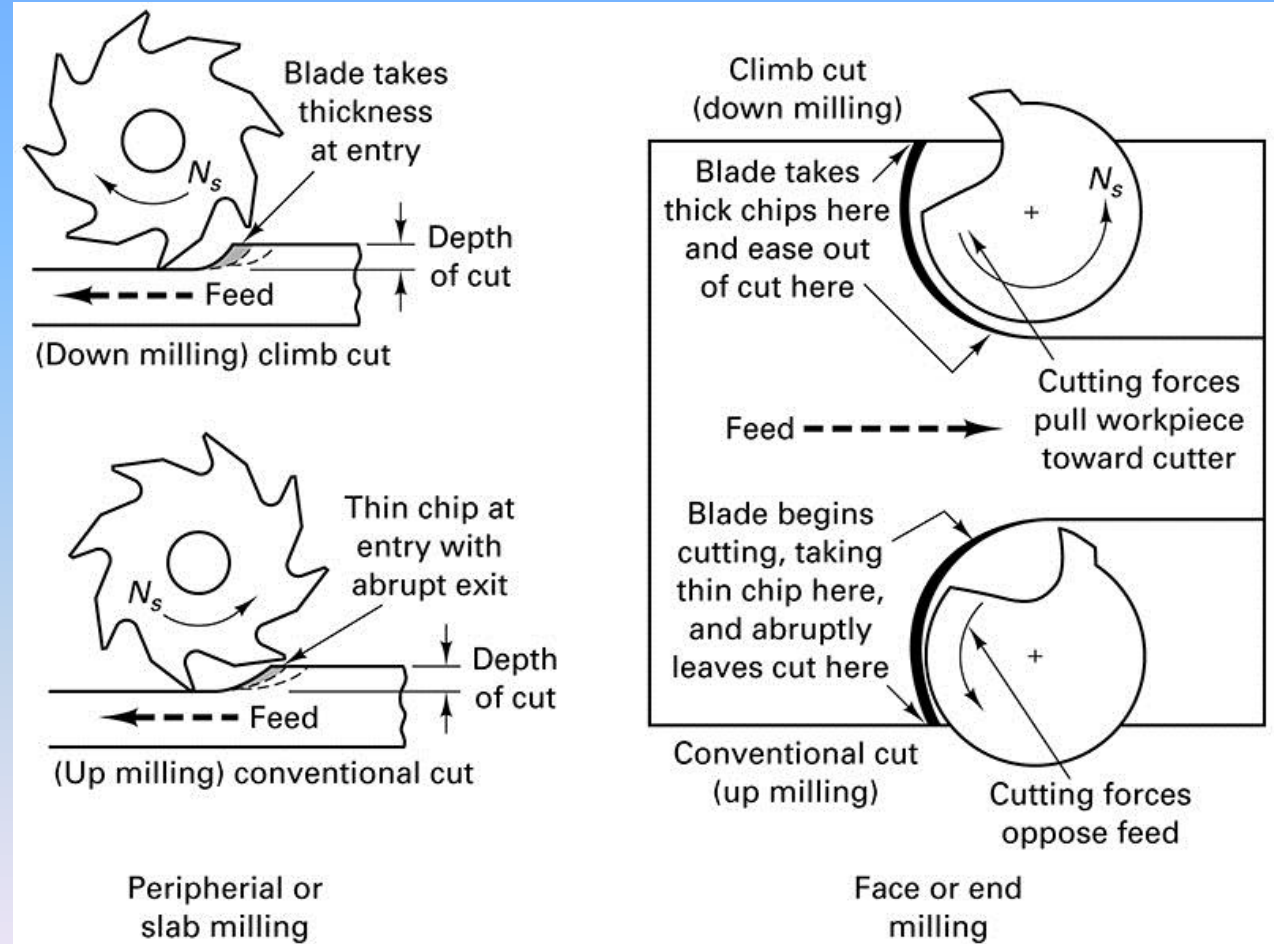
Climb cut or down milling versus conventional cut or up milling for slab or face or end milling.
